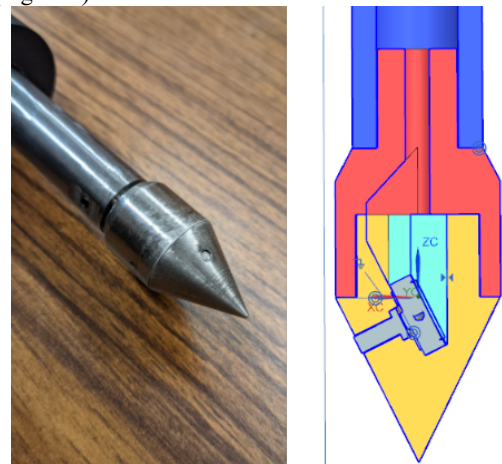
Penetrometer head CAD model (right) and fabricated cone head (left).
